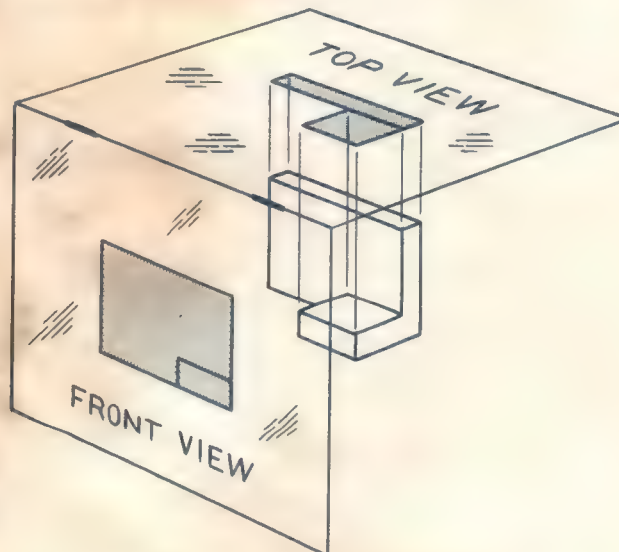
PROJECTING IMAGE TO FORM TOP VIEW
